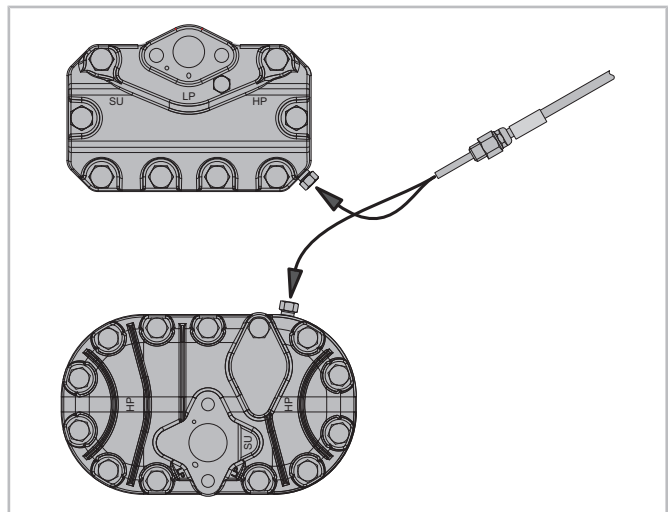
With start unloading, mount the temperature sensor directly on the SU cylinder head.
